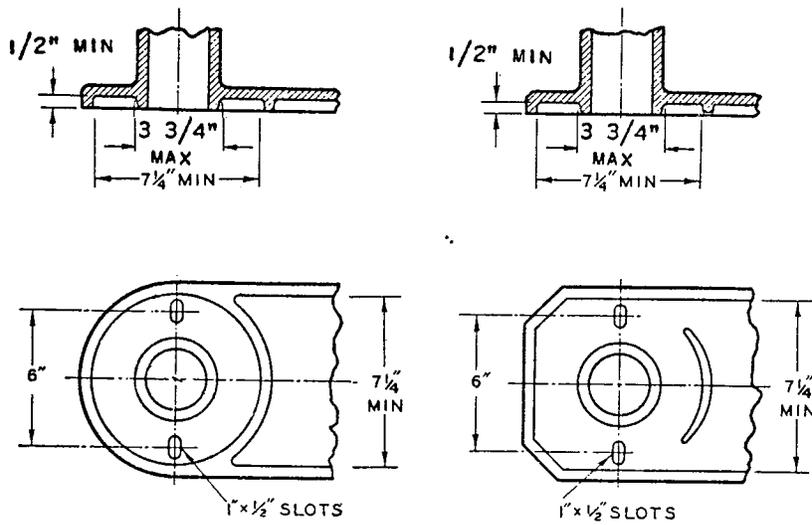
OUTLET OF FLOOR-MOUNTED WATER CLOSET BOWLS. (PAR. 4.1.6)
